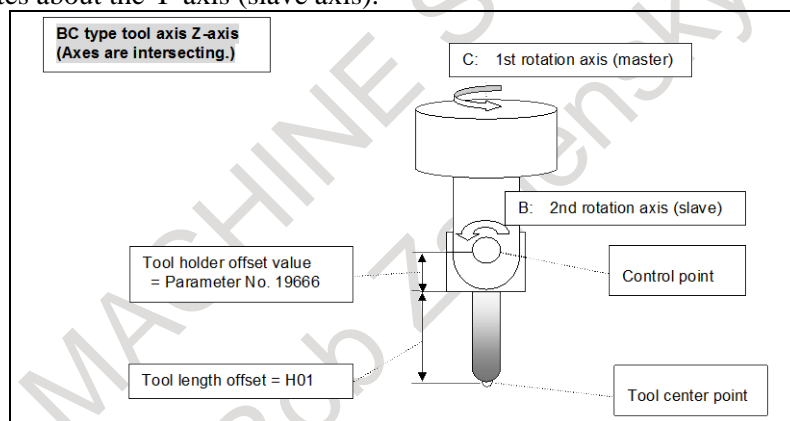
(a) Example of operation on a machine of tool rotation type
